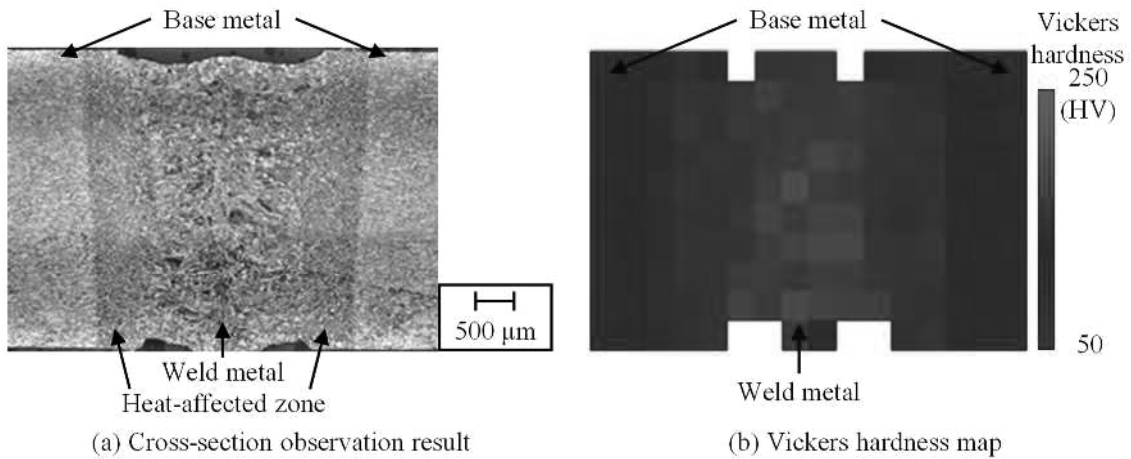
Welding properties of laser welds for SPCC.
